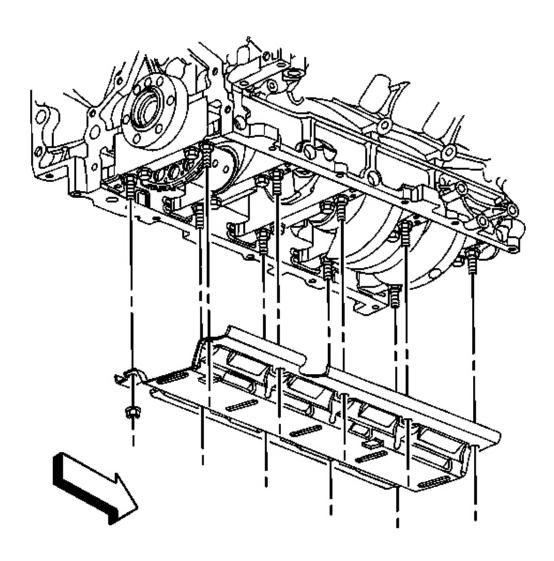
View Of Crankshaft Oil Deflector & Nuts Courtesy of GENERAL MOTORS CORP.
